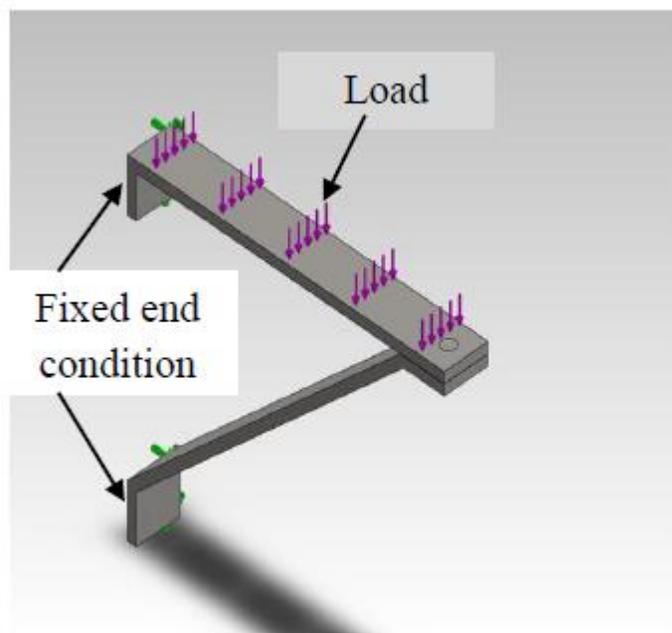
Components of a Load-Carrying Hanger Assembly
